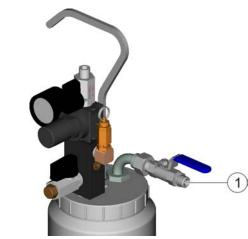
Disassemble material hose from the upper material outlet (type 1)
